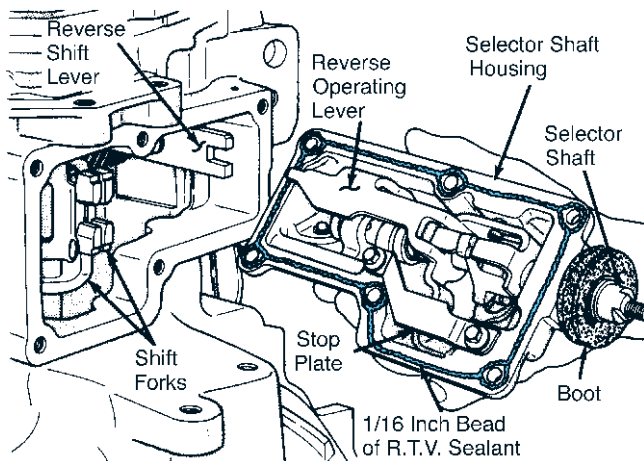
Most transaxles use formed-in-place gaskets between the case parts and covers, like the RTV sealant used here. (Courtesy of DaimlerChrysler Corporation)
